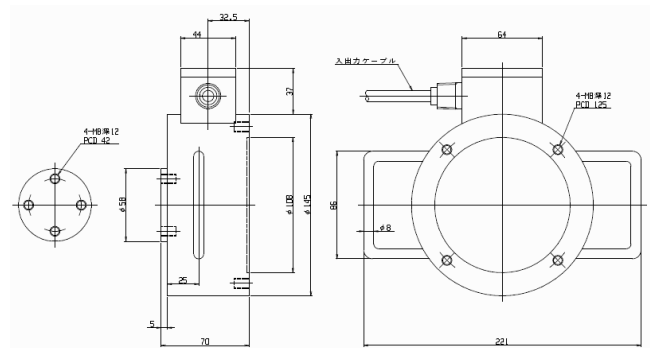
Appearance and drawing of a load cell (CLM-10KNS)
